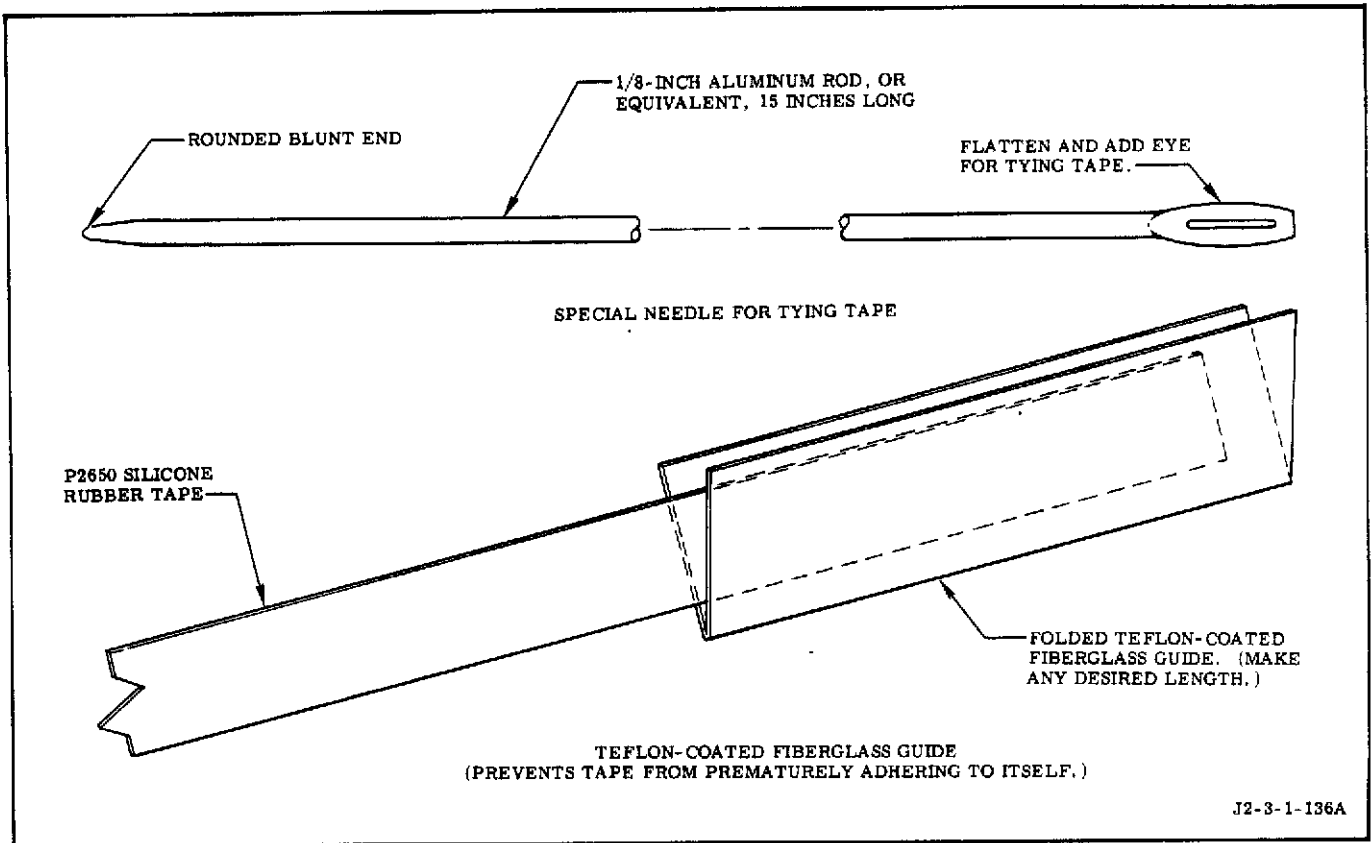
B. Special Tools for Installing Fuel Bleed Line and Mounting Bracket Insulation
